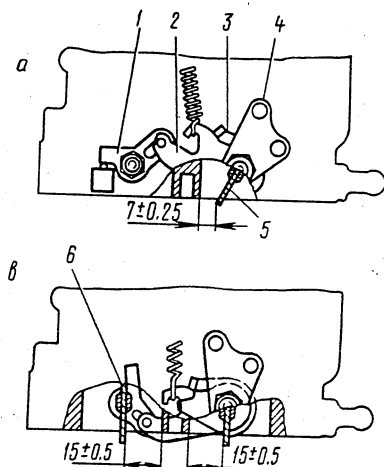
Adjusting Full and Part-Way Opening of Throttle Valves in Carburettor 2106-1107010:
